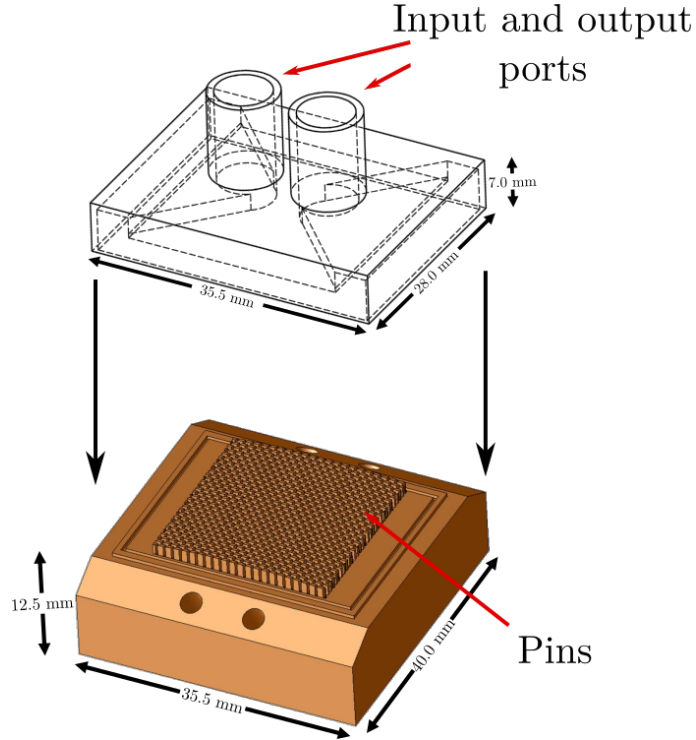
Drawing of the heat exchanger. The top stainless steel part provides the input and output port for coolant, which can be pushed through using a cryogenic pump. The copper heatsink and the stainless steel part are brazed together to form a leak tight connection. The purpose of the pins is to increase the surface area for the coolant to exchange heat with. Image from [67].
